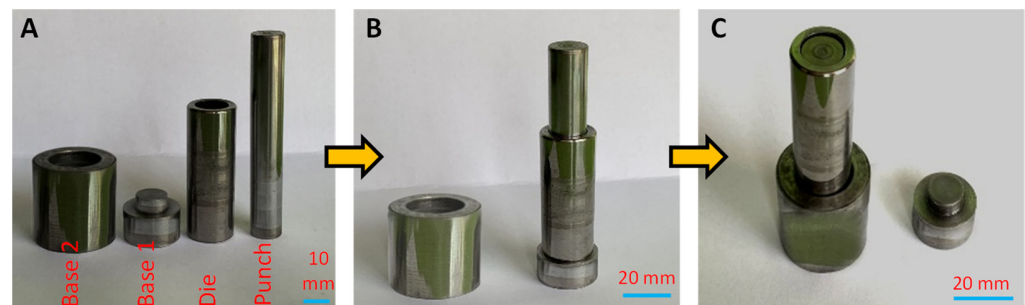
(A) Parts of the mold, (B) pressing powder position, (C) sample removal position.
